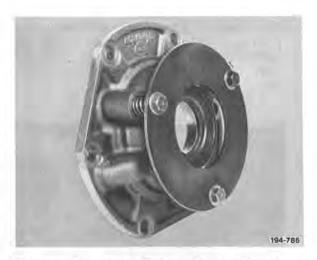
Main Drive Pinion Bearing Cover, Non-Current
